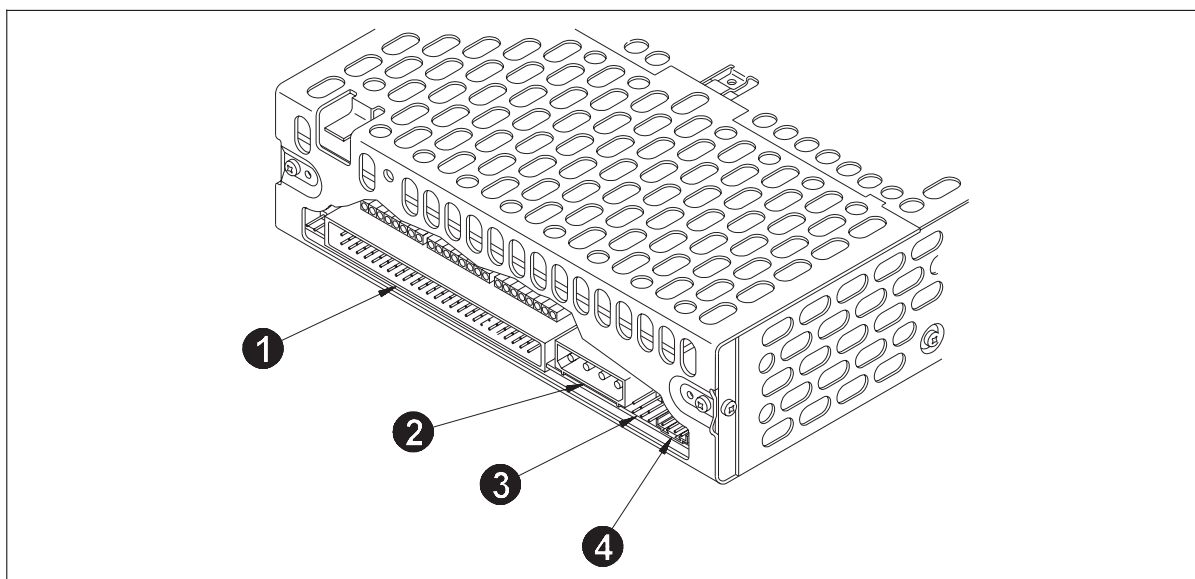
Cable connections to the tape drive (Note: The position of the connectors may differ on your tape drive.)
